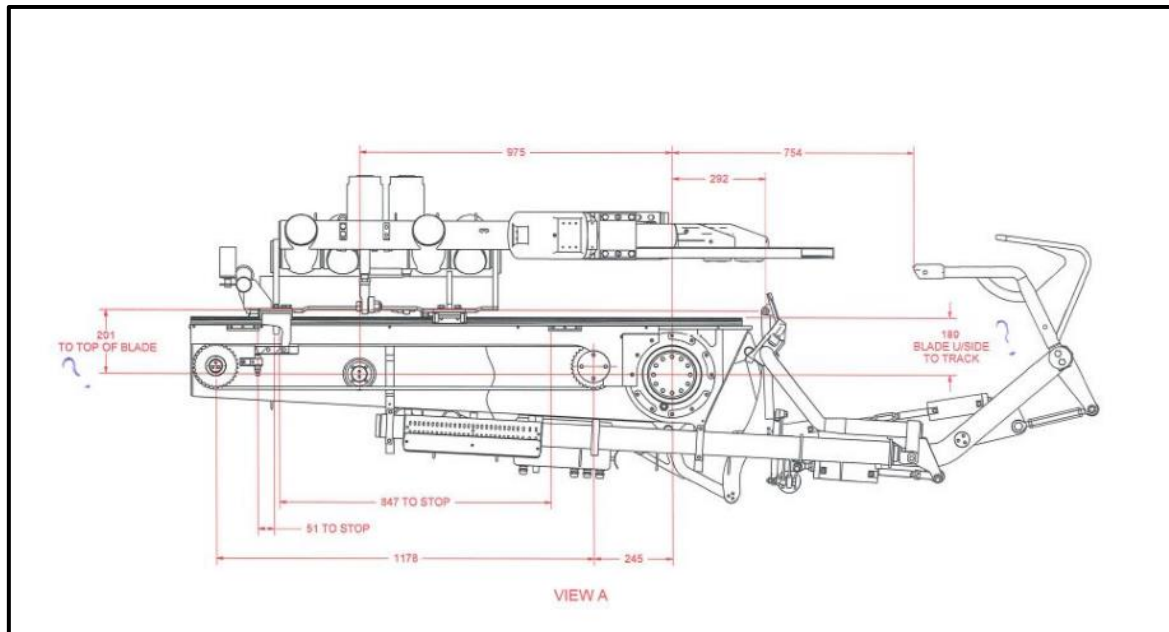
Tower - Pivoting Carriage Assembly Side View
